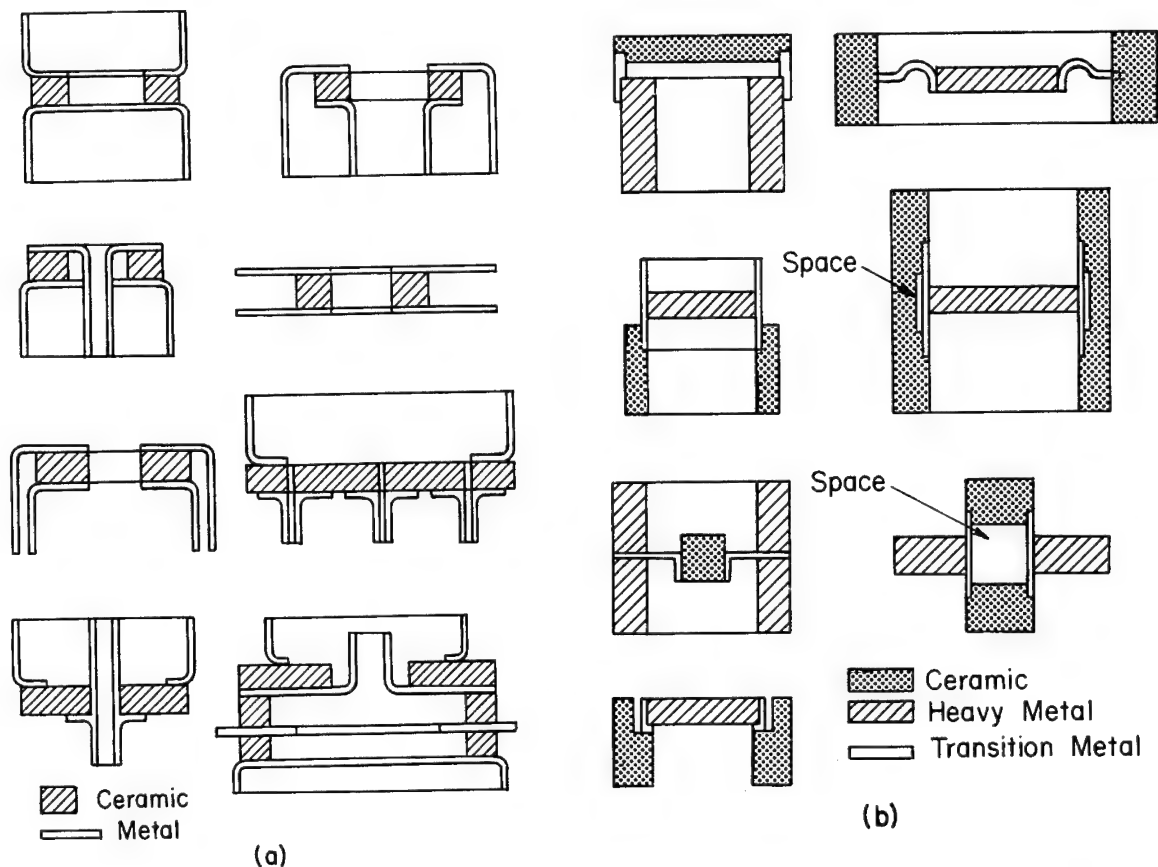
Ceramic-to-metal joint configurations (ref. 52). (a) Butt and lap seal joint designs; (b) joint
